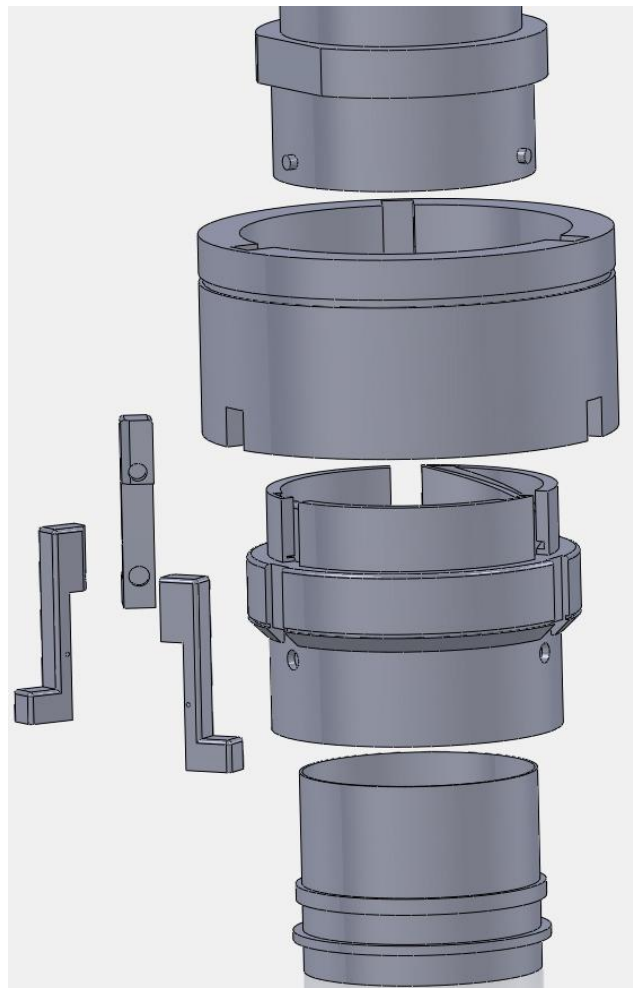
Modified spring-loaded latch and lever release mechanism (exploded view)
